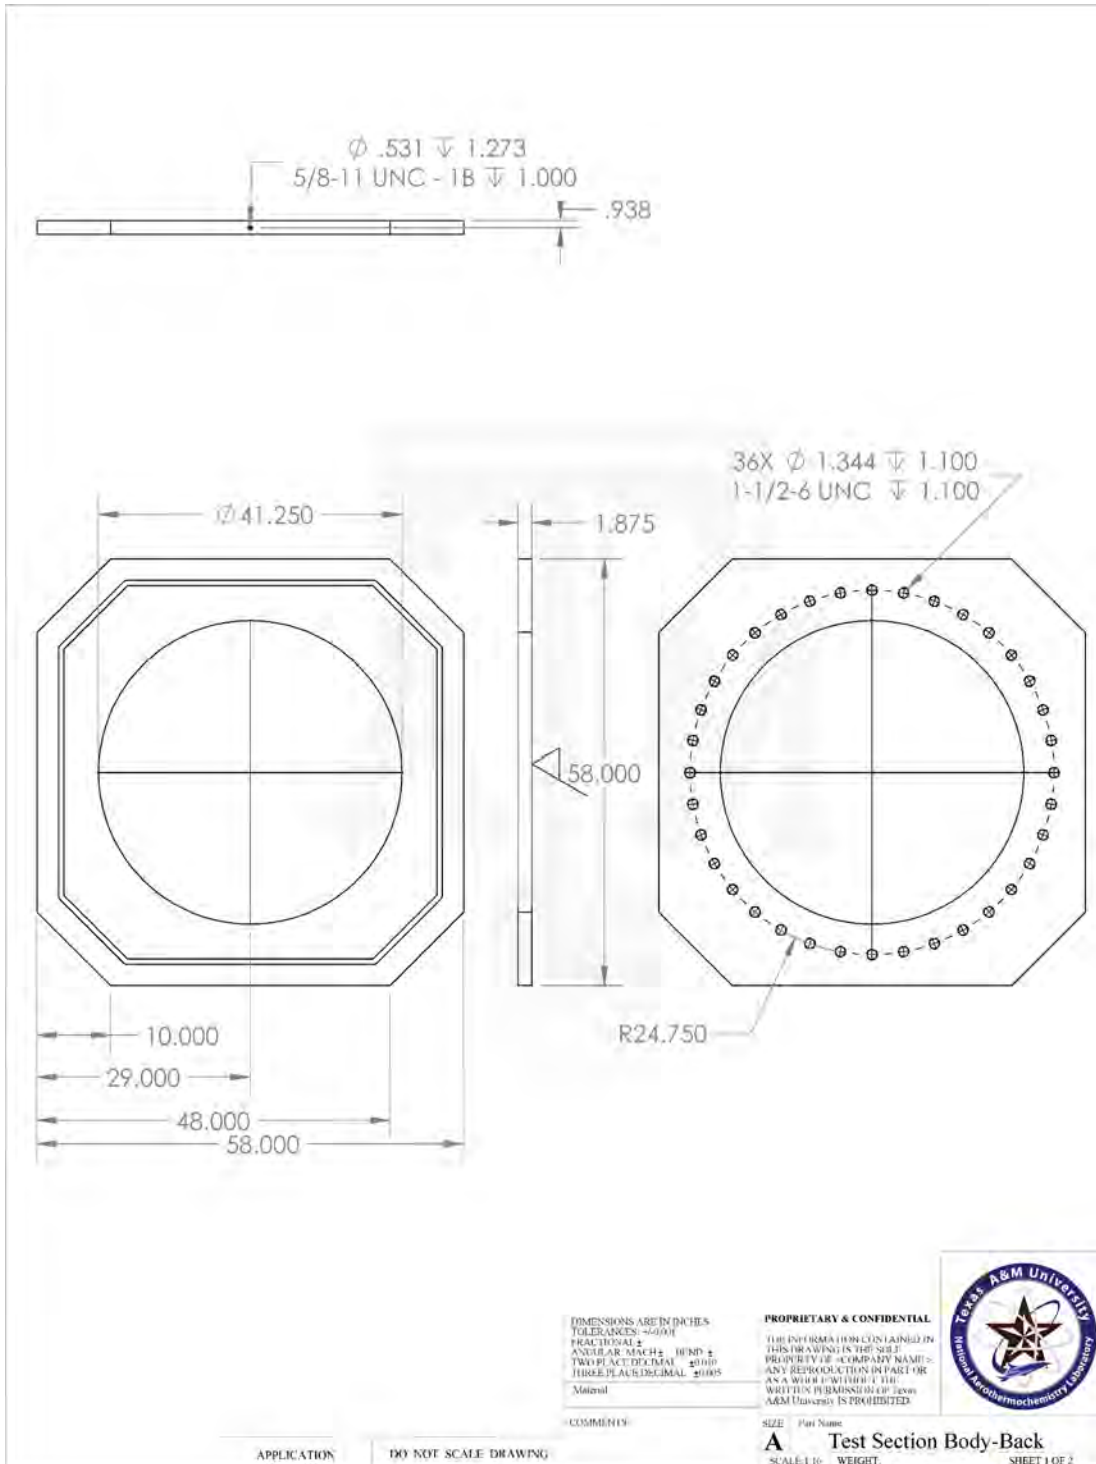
DIMENSIONAL DRAWING FOR THE BACK PLATE OF THE TEST SECTION SKELETON WITHOUT DIMENSIONS OF THE ALIGNMENT GROOVE.
